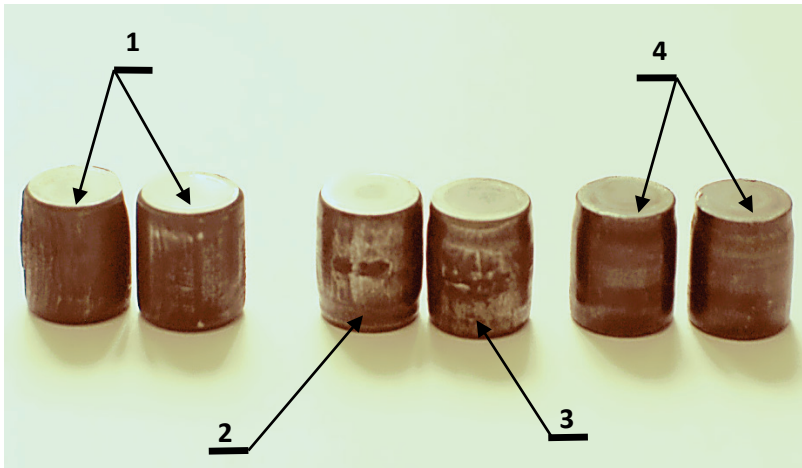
Compared diversity of rolling element surfaces: 1 – “milling” and surface washboarding traces, 2 – pitting traces, 3 – fretting traces, 4 – conical smooth grinding traces
